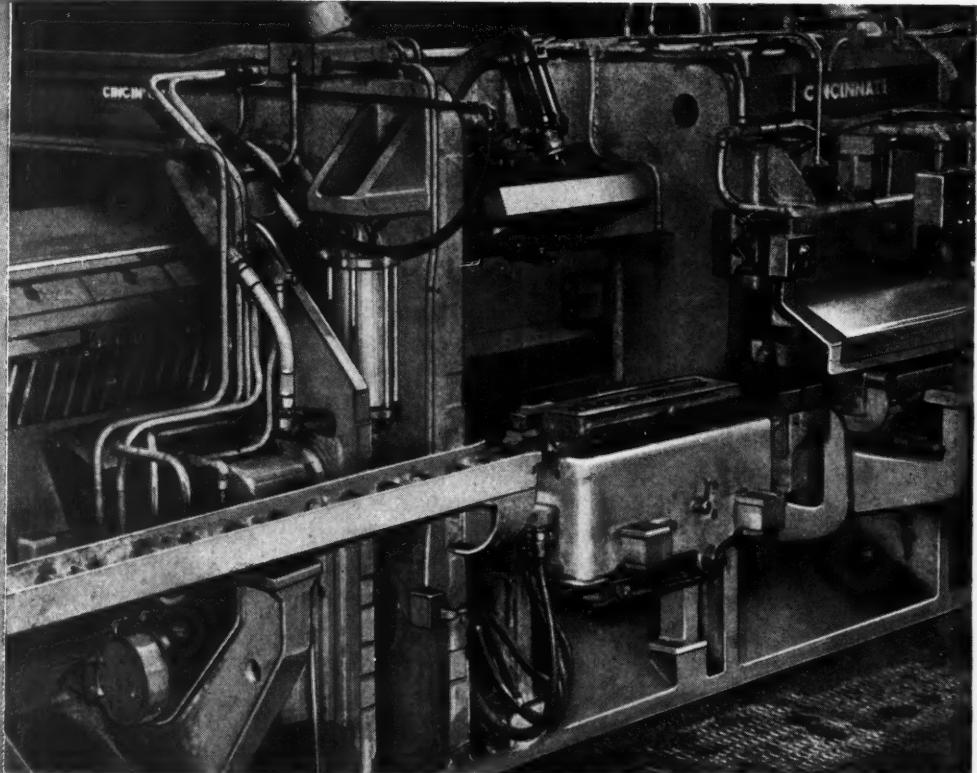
At second station, the cylinder head is again clamped in a hydraulically operated, hinged-type work-holding fixture for broaching the bottom and manifold side of head
